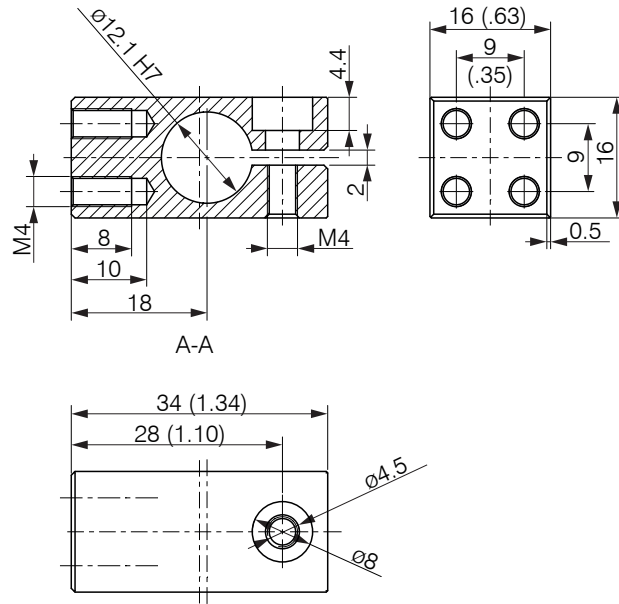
Outer clamps with installation bracket MA2404-12 for IFS2404-2, IFS2404/90-2 and IFS2407-0,1 sensors, dimension in mm (Inch)
